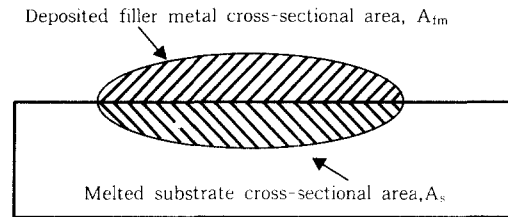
Schematic illustration of dilution in single pass weld
